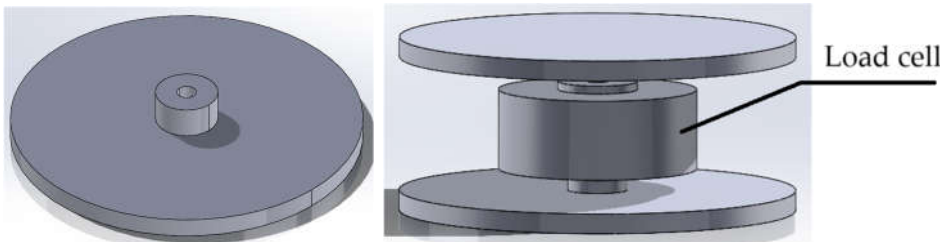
Load cell calibration part (left) [79], the assembly (right).
